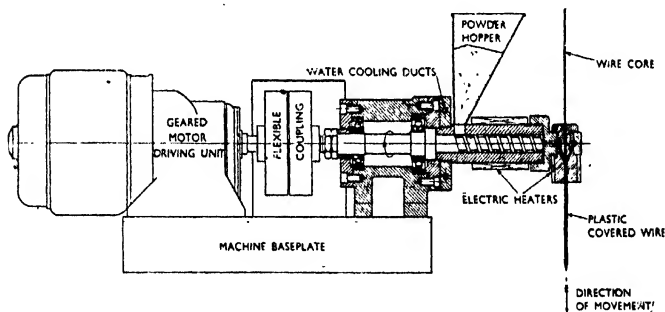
DANIELS' SCREW EXTRUDING MACHINE (*Alfred Herbert, Ltd.*)
